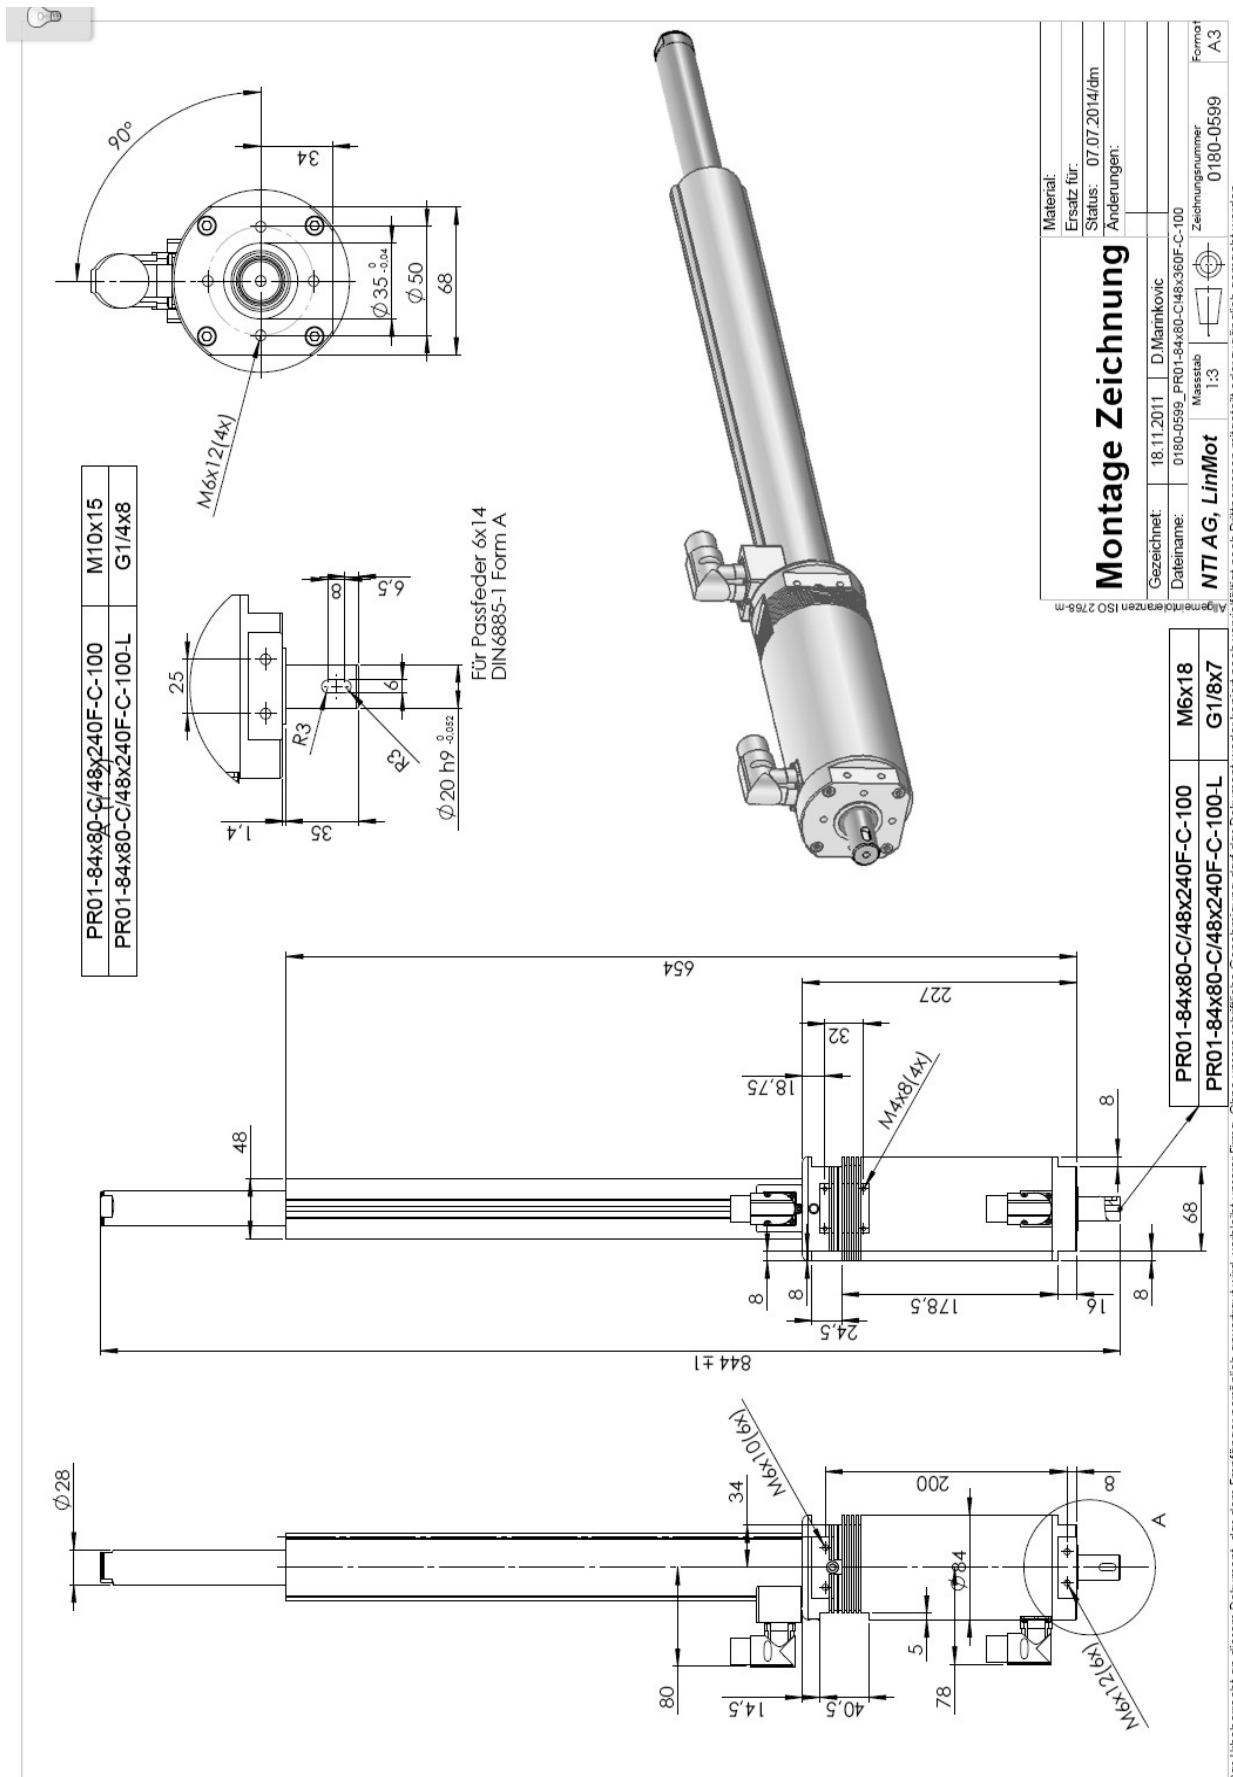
80-C/48x240F-C-100 Multifunction-Flange and MagSpring
